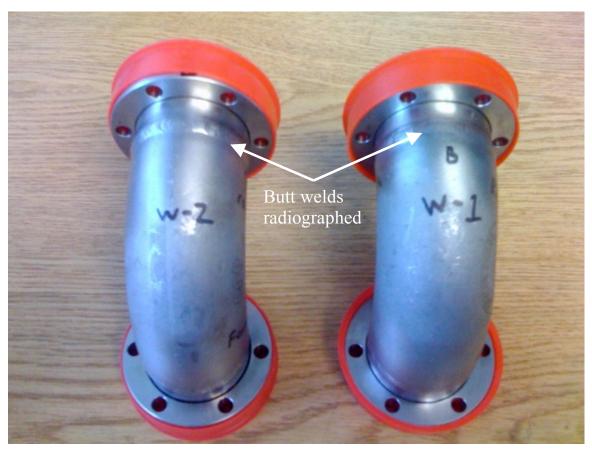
"Bo" relief valve supply elbows sent out for radiography.
